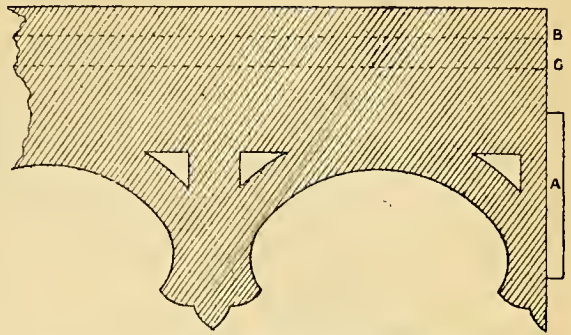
BACK PIECE CONNECTING ENDS OF FRAMEWORK.
